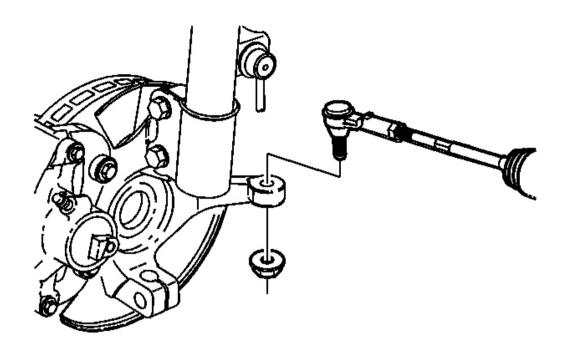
Tie Rod Outer & Knuckle Nut Courtesy of GENERAL MOTORS CORP.
